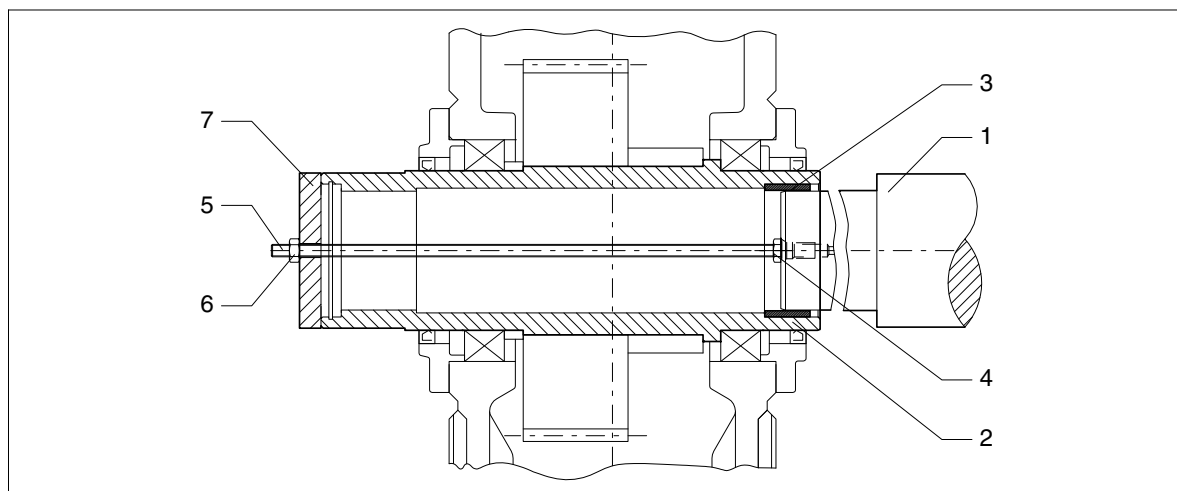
Hollow shaft in shrink-disk design, mounting with DU bush
